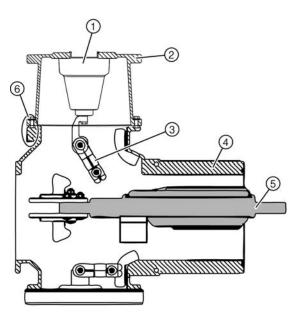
Preparing busbar assembly on the panel to be lined up (example 4000 A)
